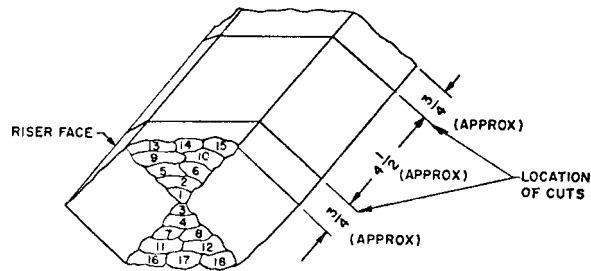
Weld Test Bar (As Cast)
